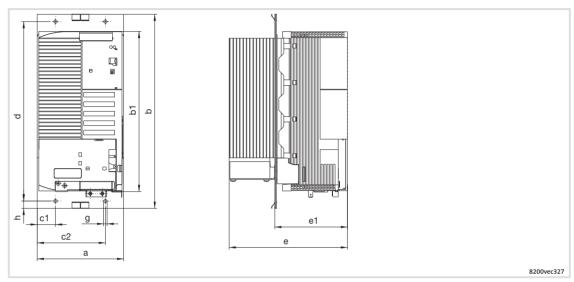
Dimensions for thermally separated mounting 3 ... 11 kW
